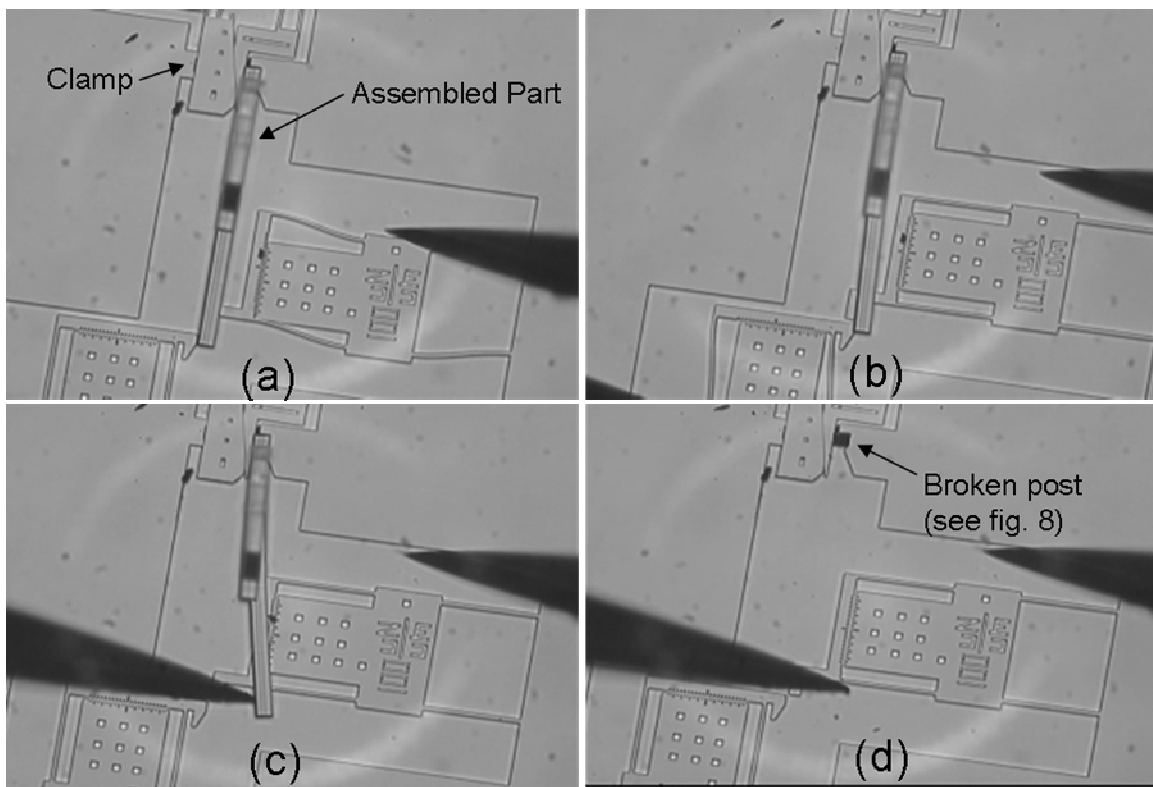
Pullout force test of clamp socket. (a) pulling straight out using a microfabricated force gauge. Maximum force the force gauge can apply is 2mN. (b) Pushing sideways using a force gauge, (c) pushing directly on the assembled part with a probe tip, (d) after part breaks
